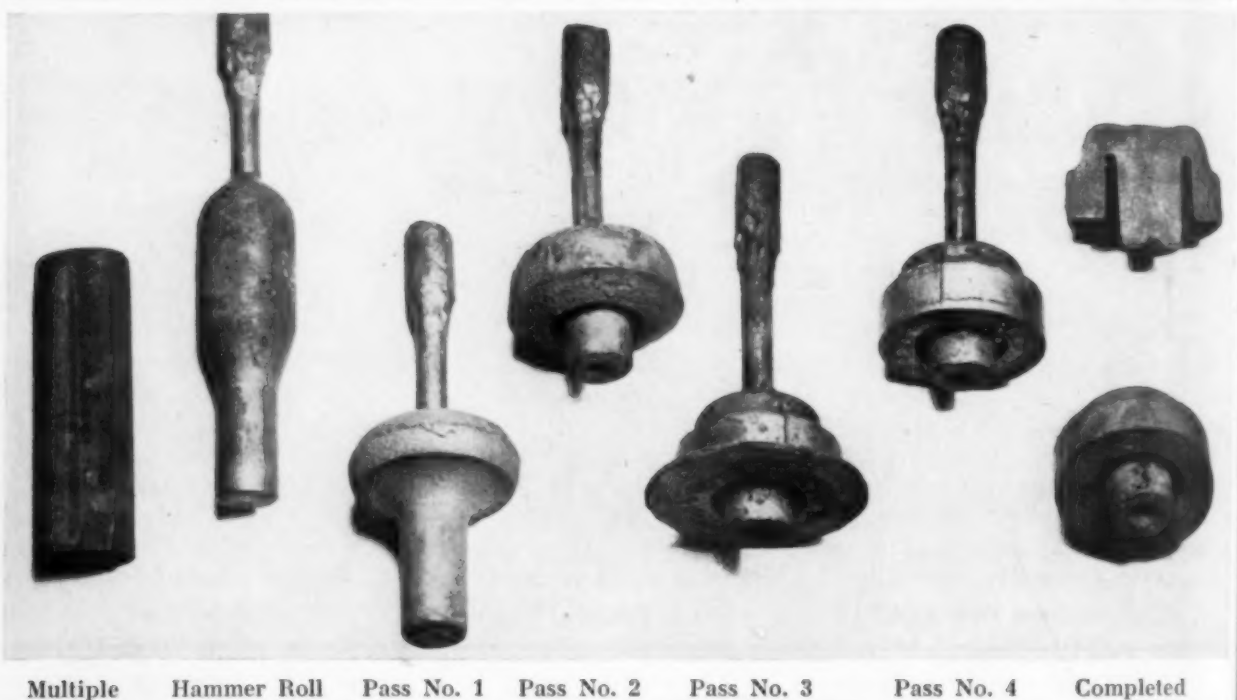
Reduction Gear Pinion Produced by Combination of Hammer Forging and Upsetting. Steel: A.M.S. 6250. Weight of forging: 6.2 lb. Note depth of groove, as shown by sectioned forging at upper right
